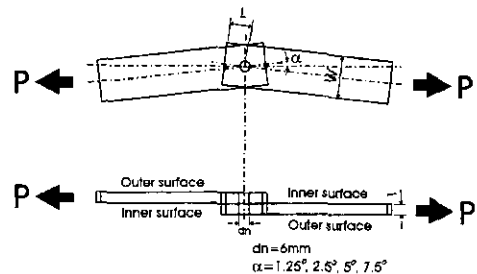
Dimension of standard model of IB type spot-welded lap joint
